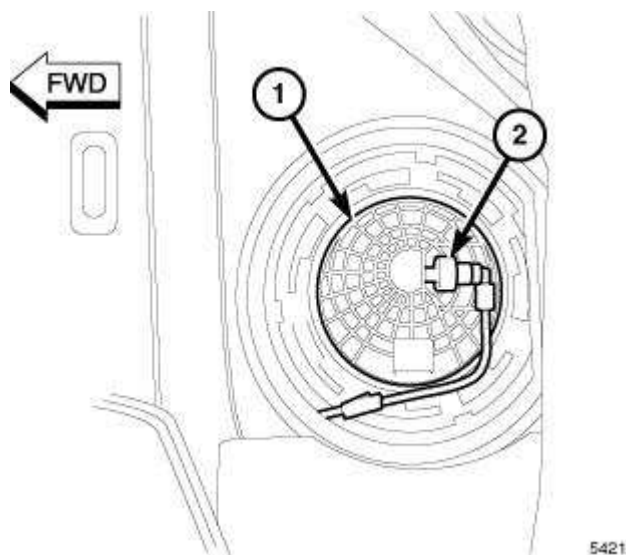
Right Side Auxiliary Fuel Pump Module And Fuel Supply Line
